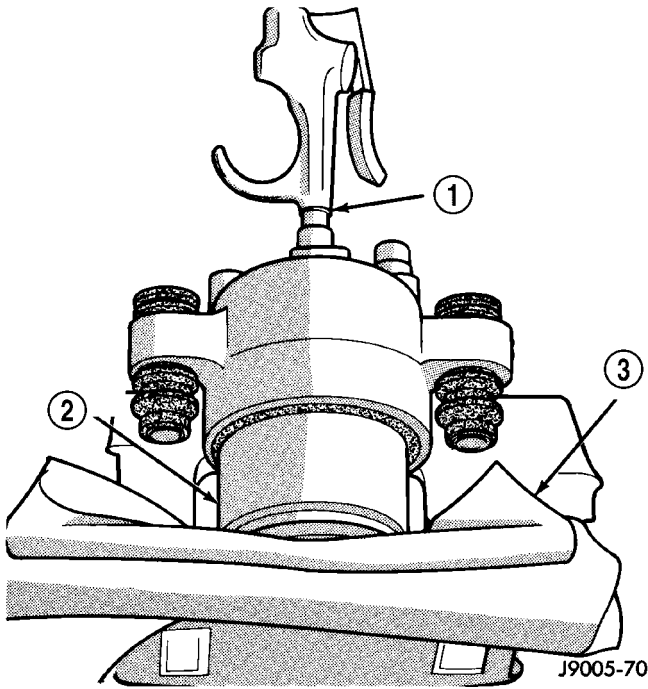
CALIPER PISTON REMOVAL - TYPICAL
